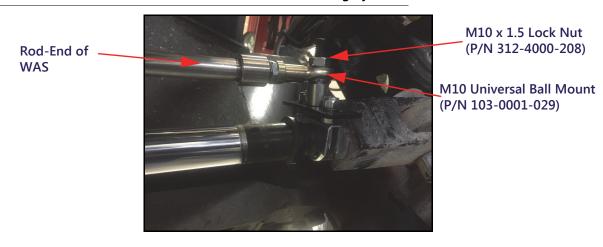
Small WAS Mounting Bracket Installed on Rod-End of Steering Cylinder
